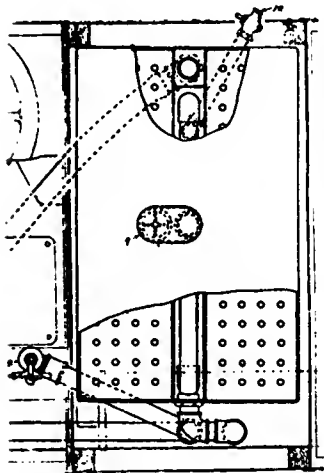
Generator with top cut away to show holes in pulp filling.
